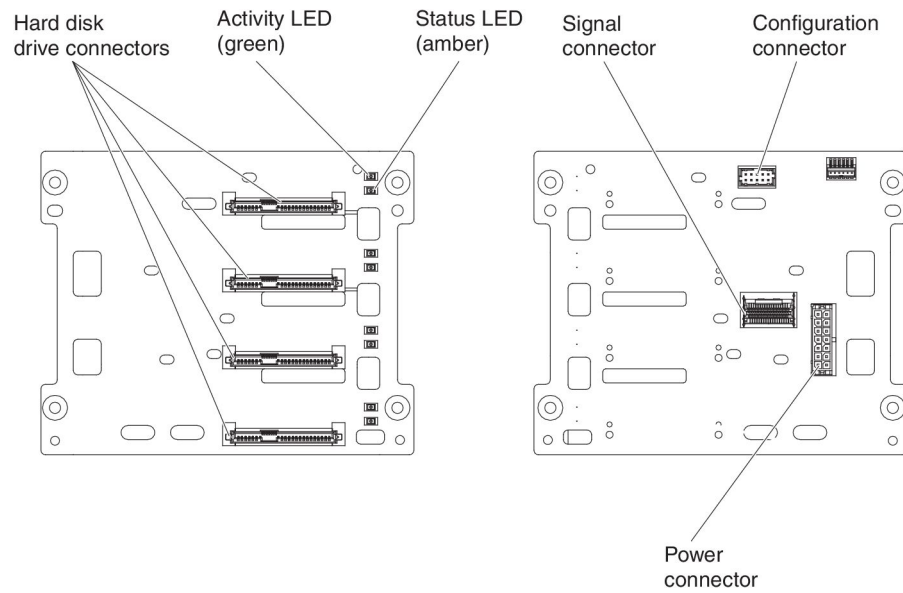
Connectors on the 3.5-inch hard disk drive backplane
